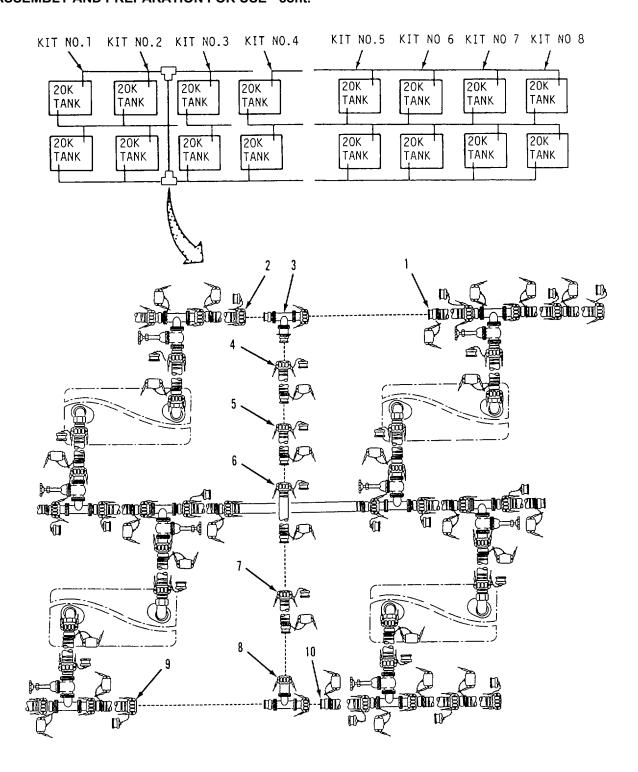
Interconnection Kit Assembly (Sheet 1 of 2).
